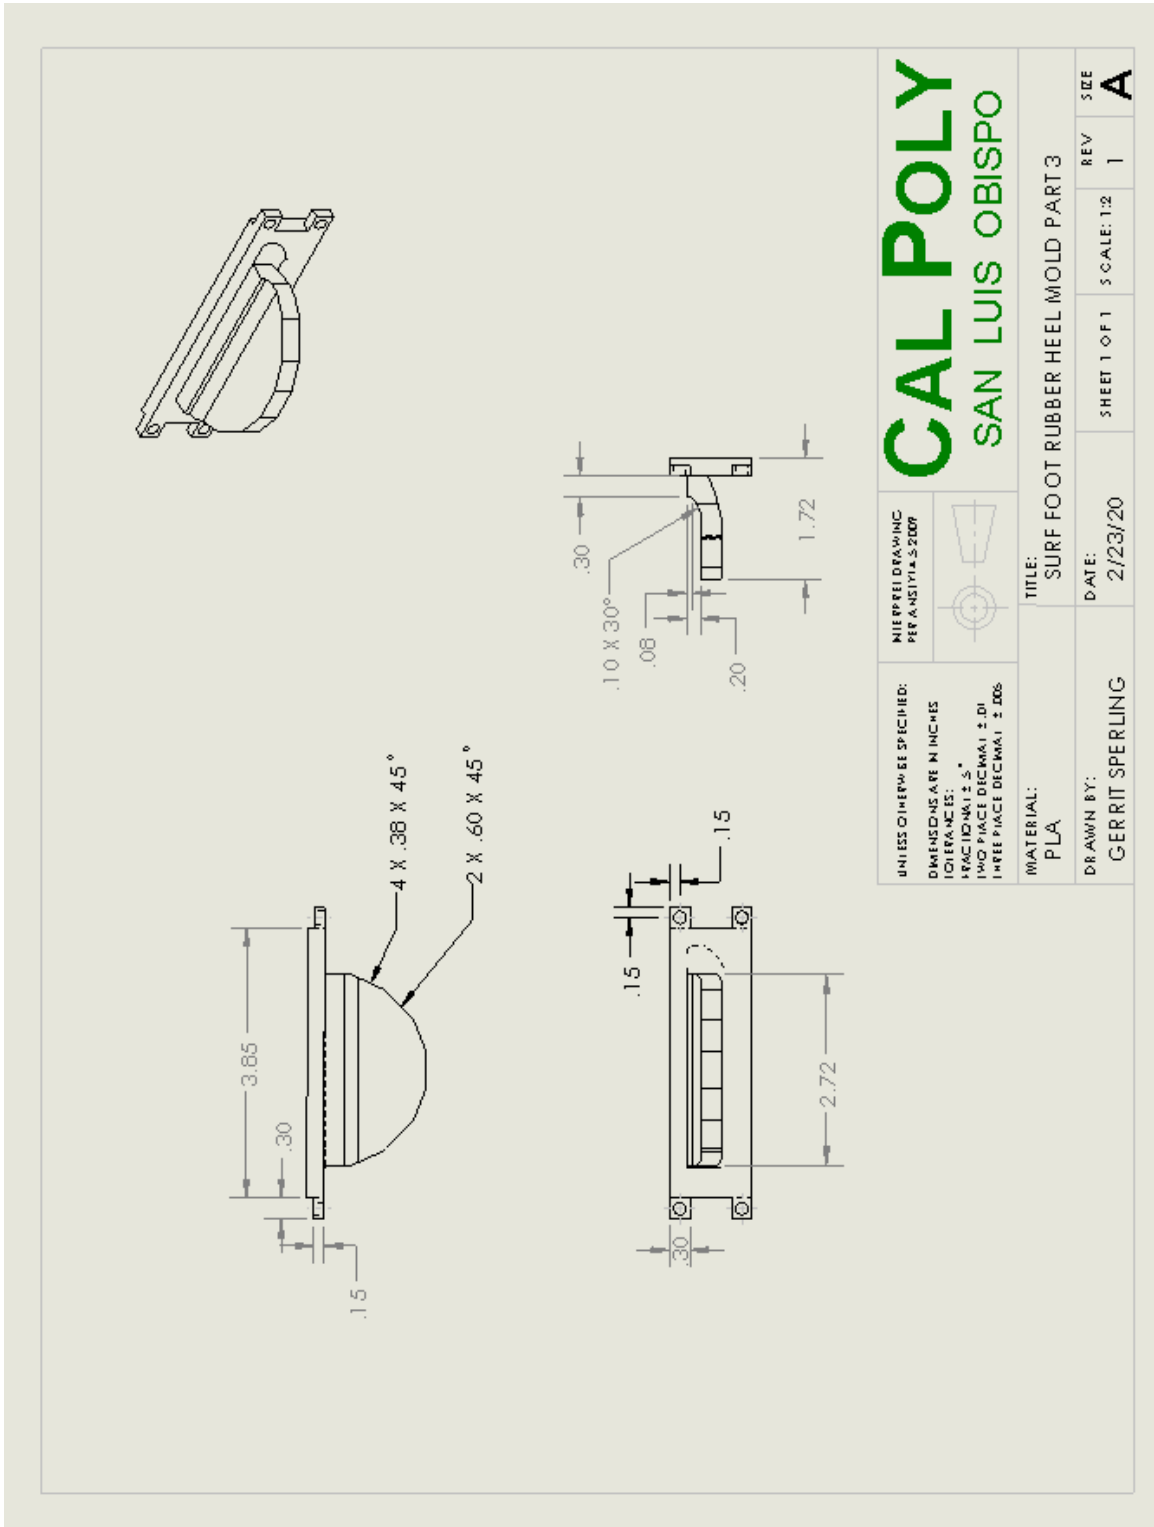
Detailed Drawing of Inner Mold for Rubber Heel
